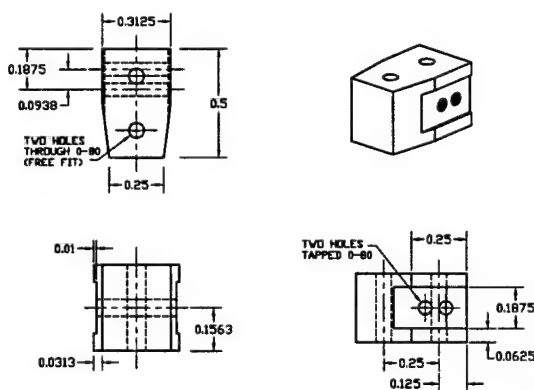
A bakelite block of the type shown in Fig. 20. Dimensions are in inches (1 in. = 2.54 cm).
